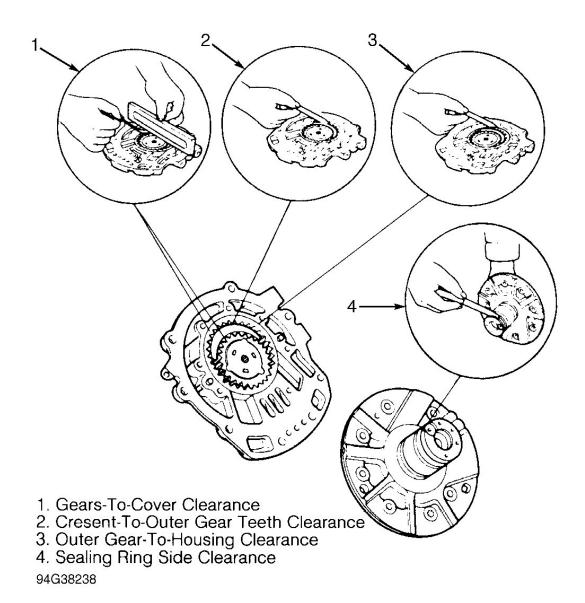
Measuring Oil Pump Clearances Courtesy of FORD MOTOR CO.
